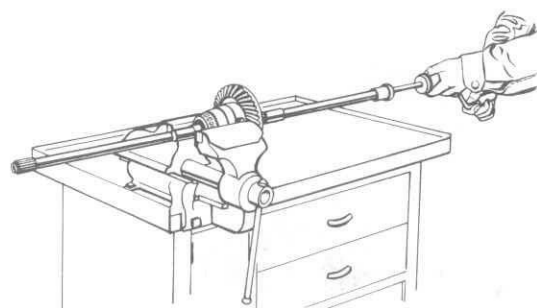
12 Checking the rolling torque of the differential gears using tool A.70315 and dynamometer A.95697
